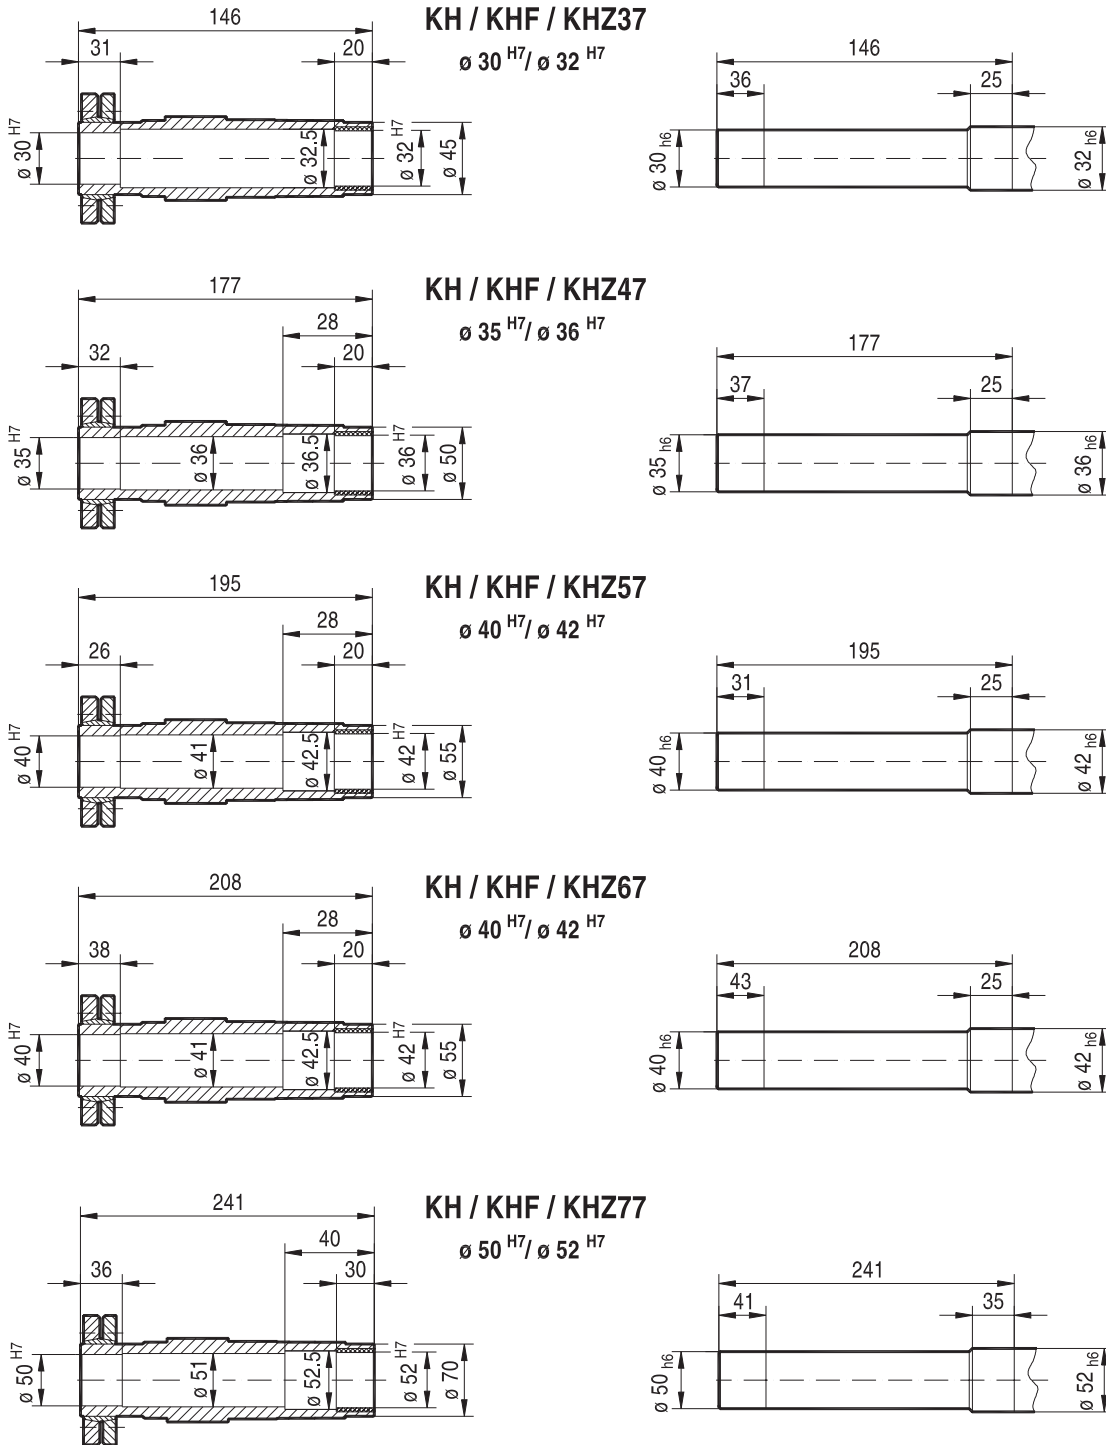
Shouldered hollow shaft KH/KHF/KHZ37...77
